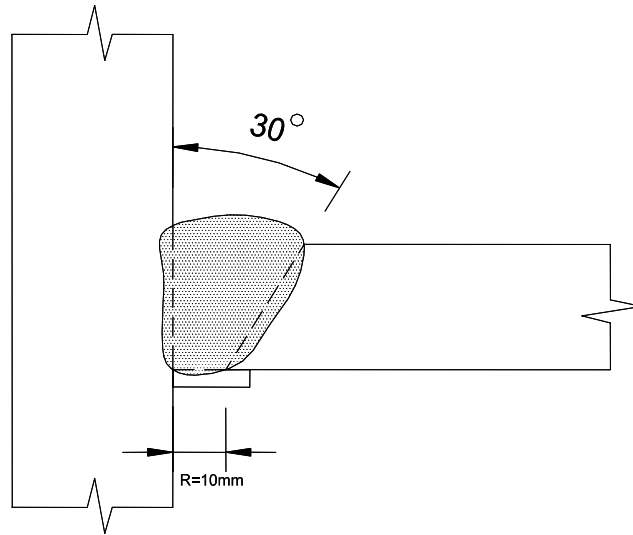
TC-U4a Groove Weld (LRFD, 1999)
